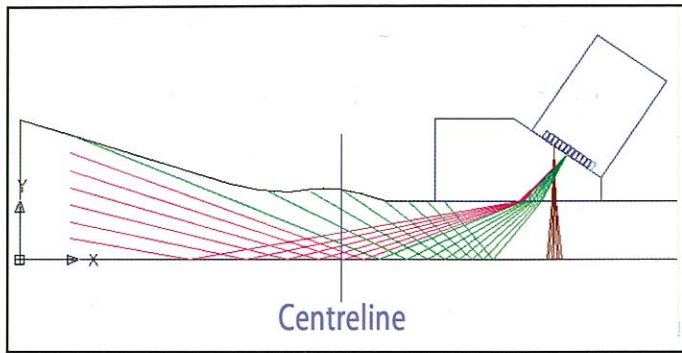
Pipe-hub cross-sectional view with superimposed ray-tracing of the three phased-array set of focal laws for a 2.5 in grayloc hub weld. Ray-tracing shows the probe at 4mm away from the weld cap edge and rays are equally spaced by 5 degrees.
